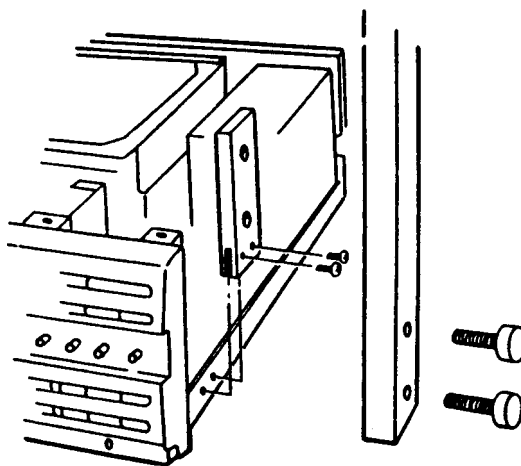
Removing the Chassis Adapter from rear of Printer
